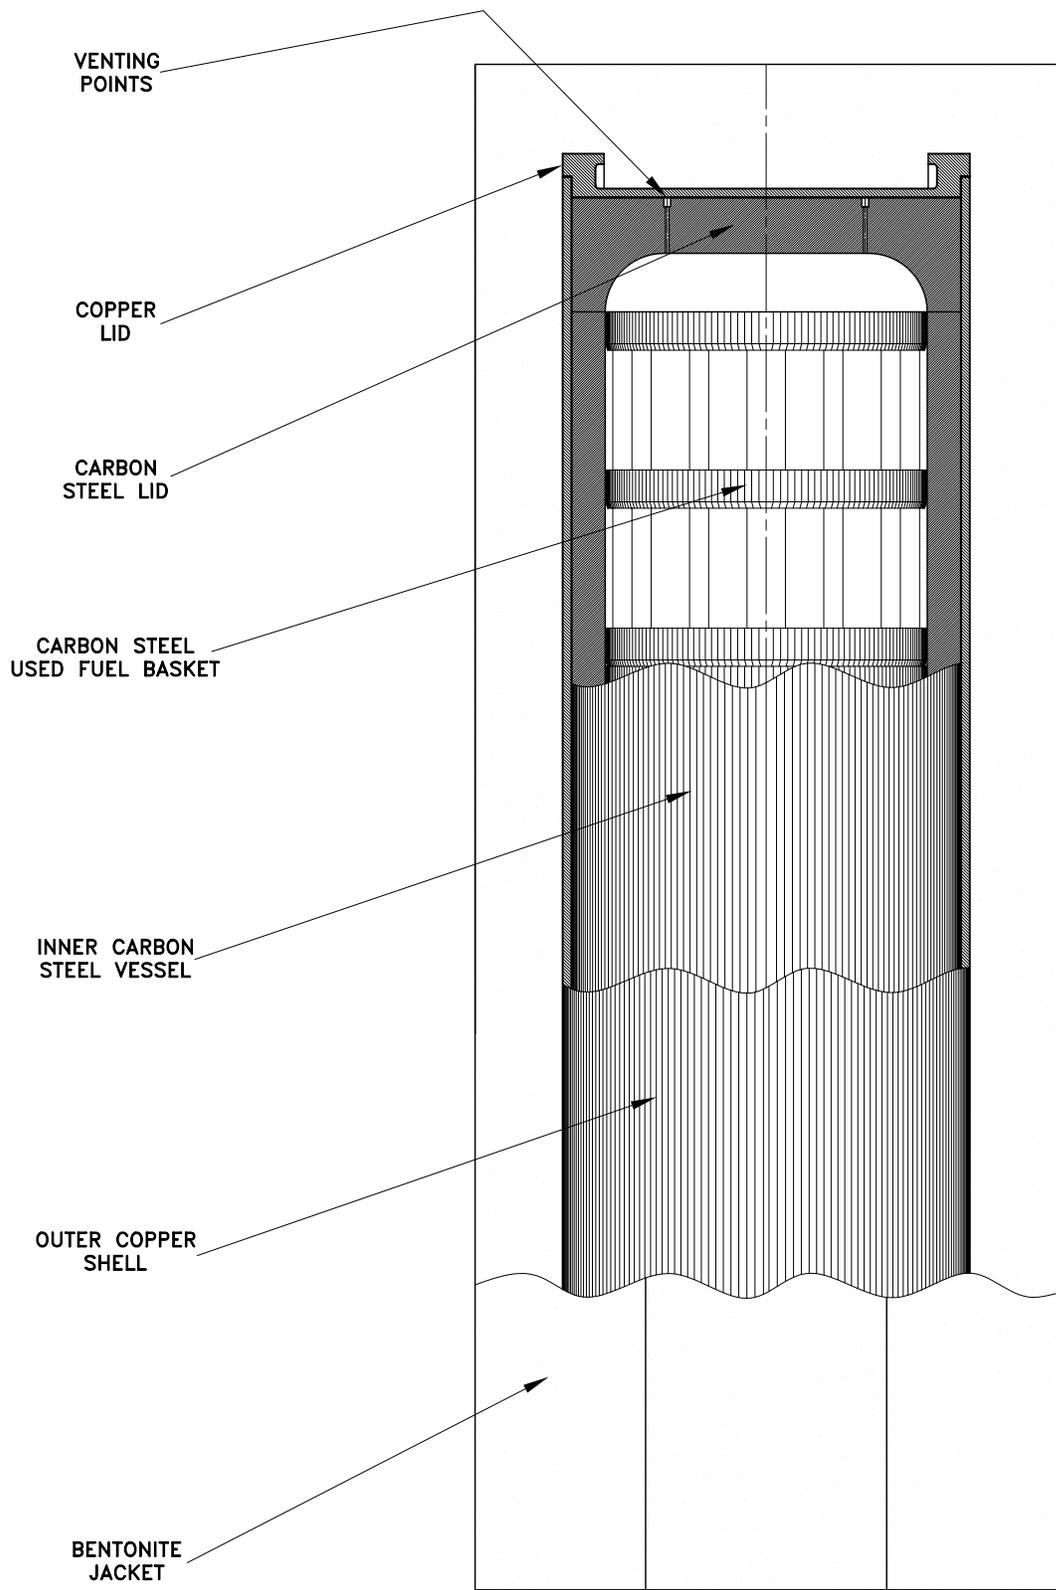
ASSEMBLY OF JACKETED USED FUEL CONTAINER (UFC)
